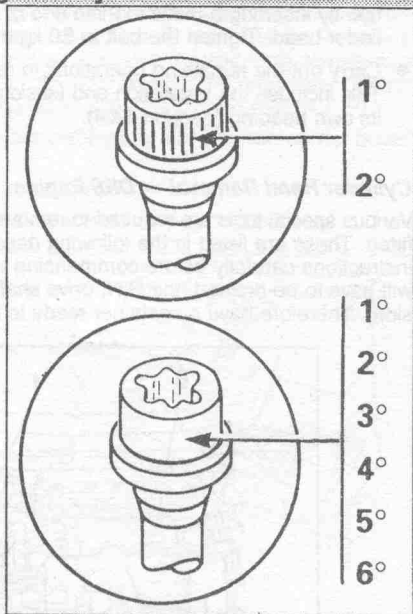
The shape of cylinder head bolts as fitted to XUD11 engines. Tighten the bolts in accordance with their appearance.
